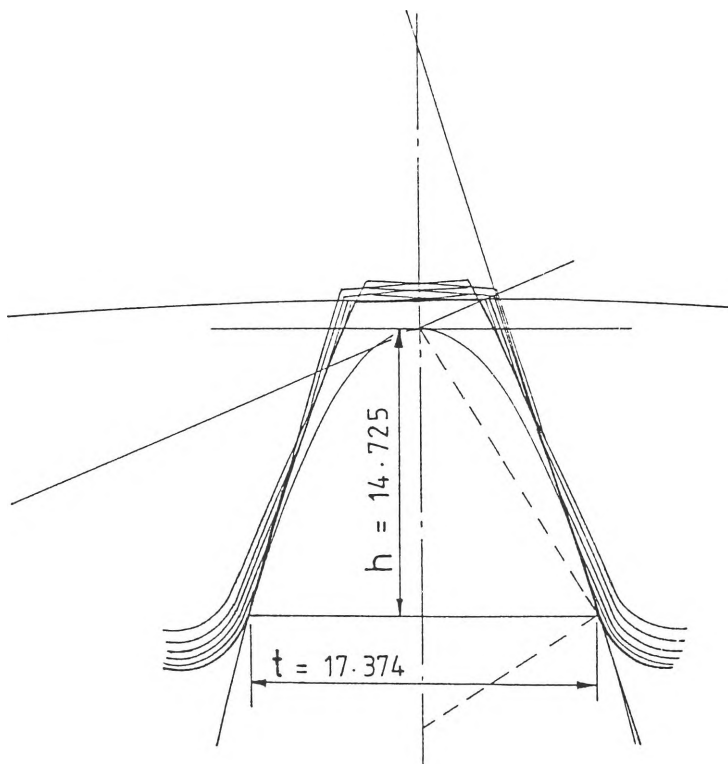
CONVENTIONAL HELICAL WHEEL PARABOLA
